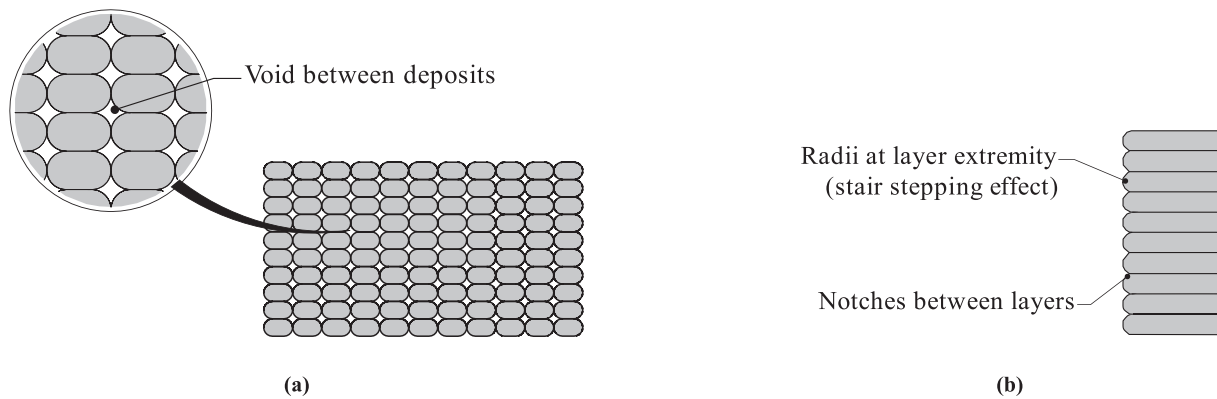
(a) Schematic of voids between extruded deposits (b) Schematic of radius and notches in extrude material layers.
